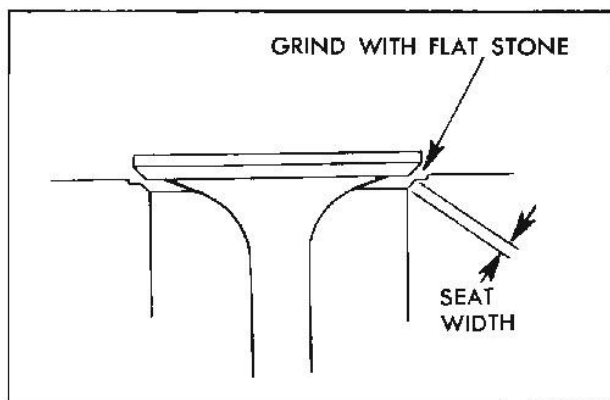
Valve Seat After Grinding With Flat Stone
